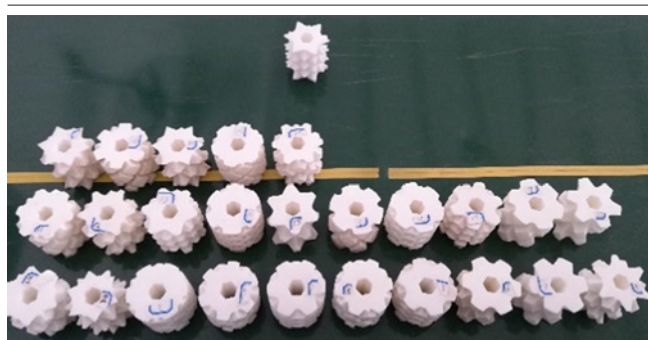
Pin-rollers for a fertilizer spreader, printed on a 3D printer.¹⁸¹ ©Elsevier B.V., 2020.
